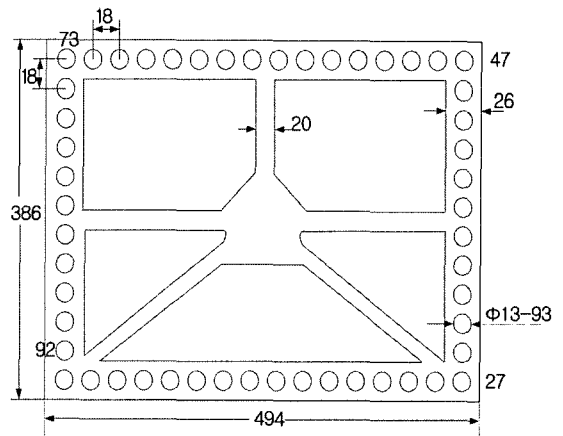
Hole-plate artifact design, stainless steel(No. of hole 73)
